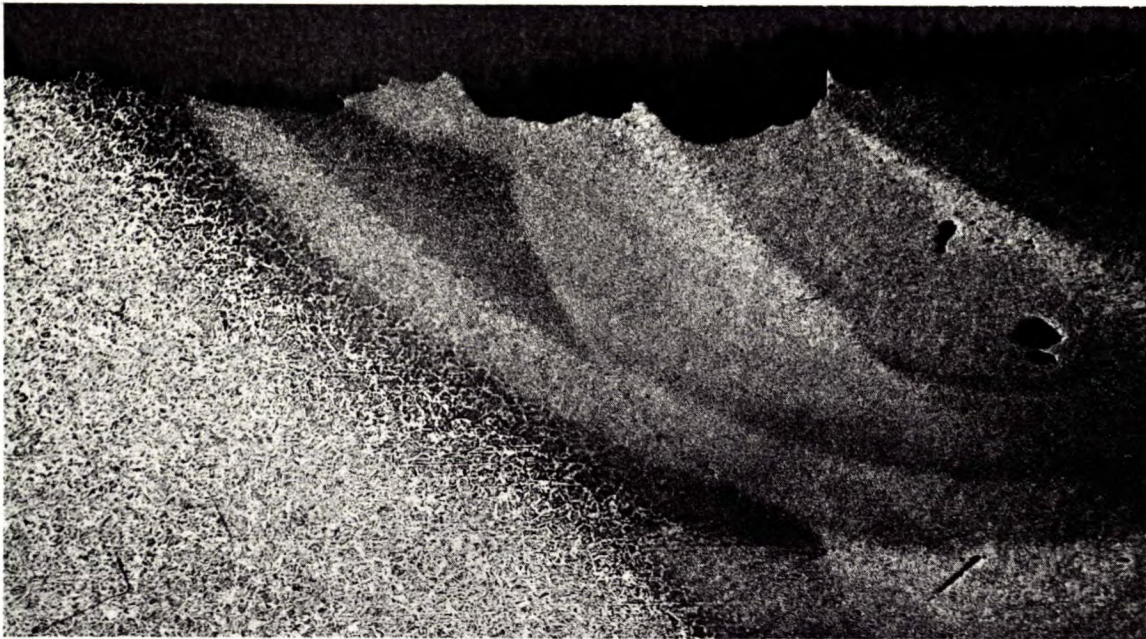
At rear edge of transverse weld, on seawater side. Mag. X11.
